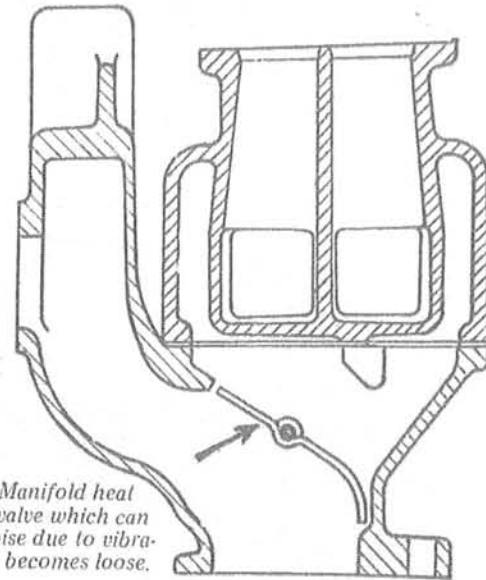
Manifold heat control valve which can cause noise due to vibration if it becomes loose.
